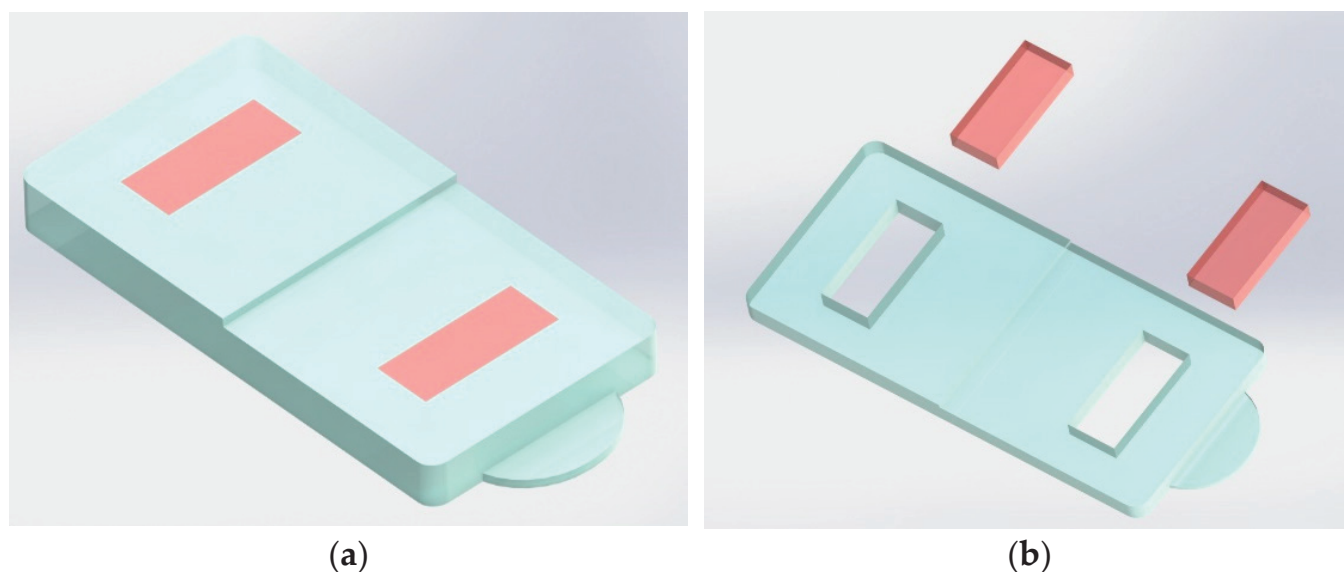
Injected parts and samples (orange blocks) collection for DSC: (a) injected part and location of the DSC samples; (b) part after the samples' removal.
